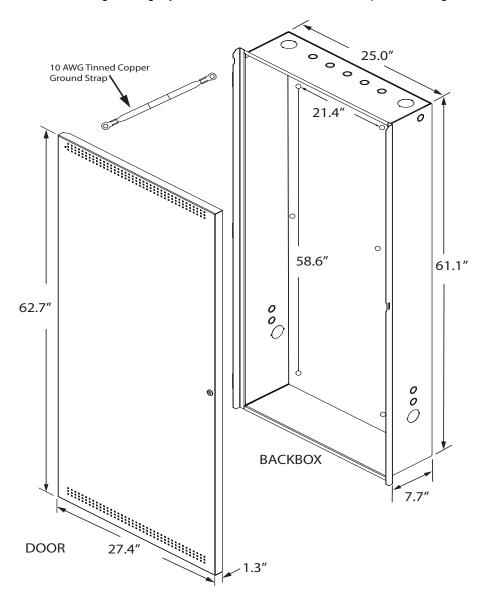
MMX-MNSXP(R) Enclosure Dimensions
